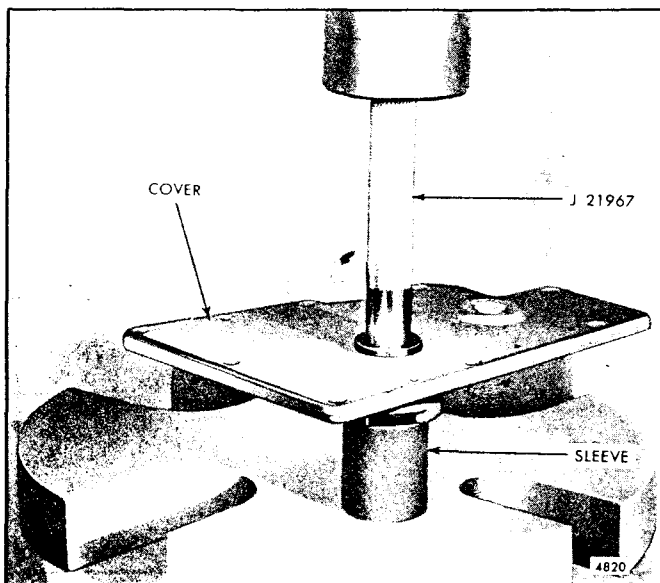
Removing Stop Lever Shaft Bushing from Governor Cover
